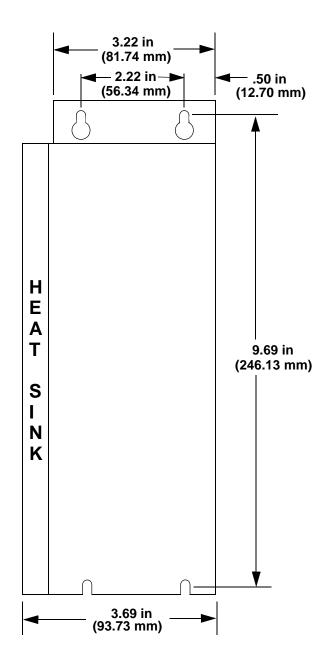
1, 2, and 3 kW Narrow Drive (-DN) - Front View
